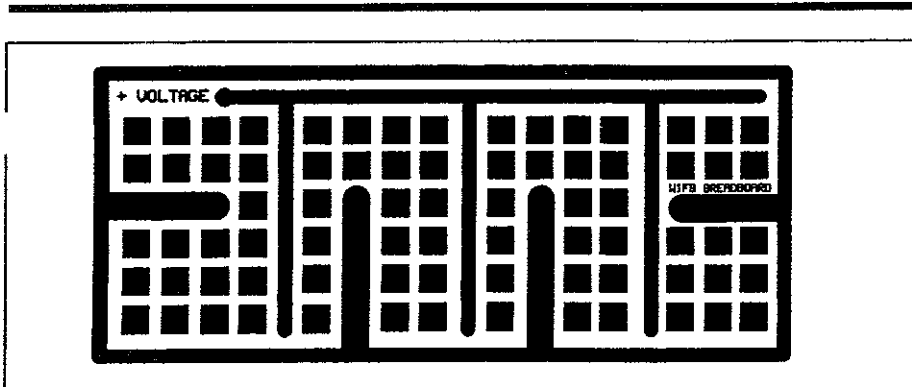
Scale etching pattern for the general-purpose PC breadboard.
